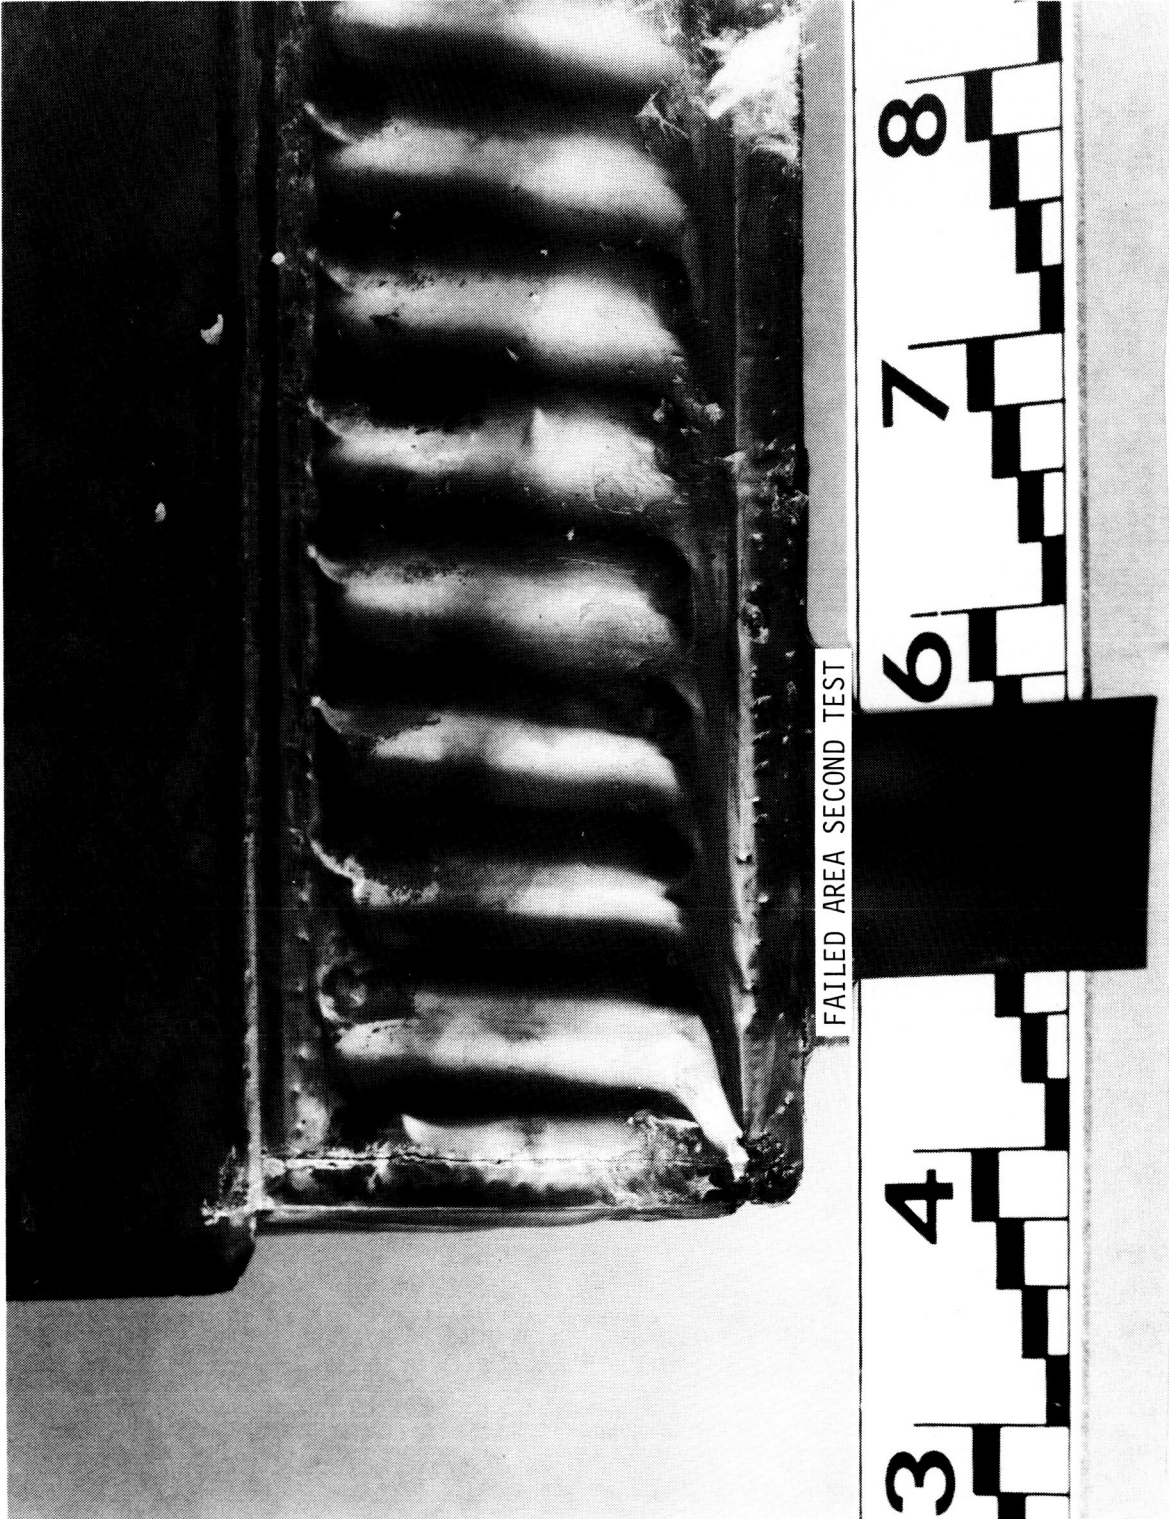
Panel Failed at 3.6 psi in the INCONEL 617 Material at the Bi-Metallic Joints During the Second Test, View 1
